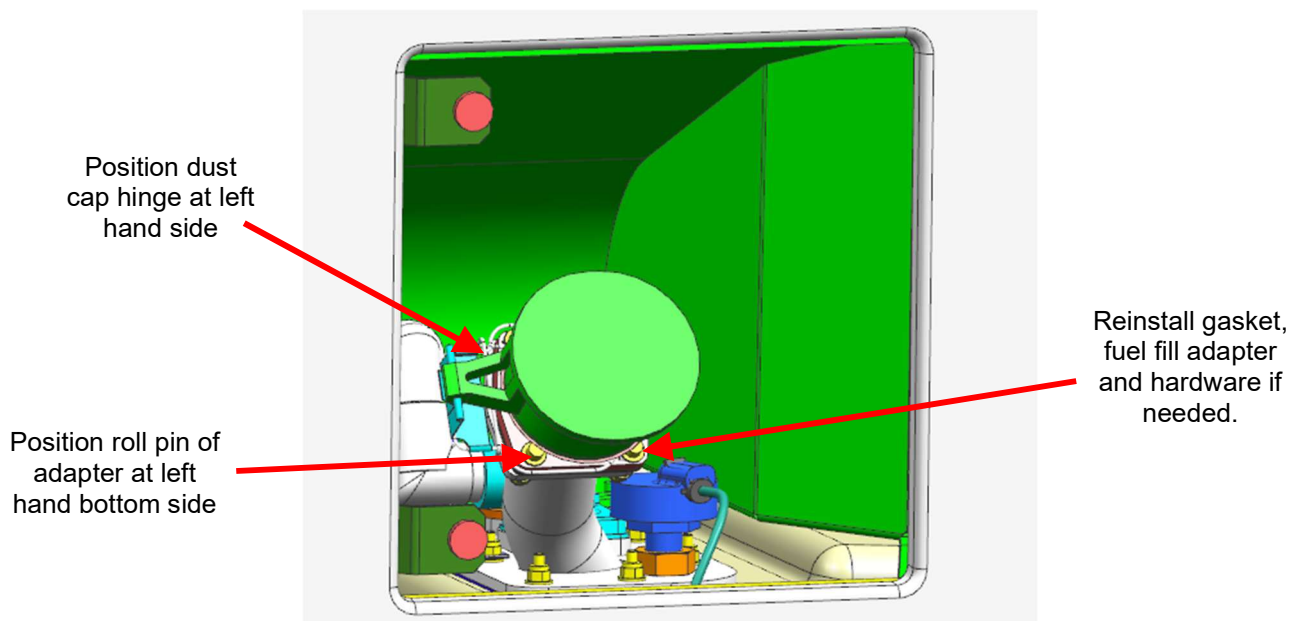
Fuel Snap Adapter Installation (Access Door Removed for Clarity)
